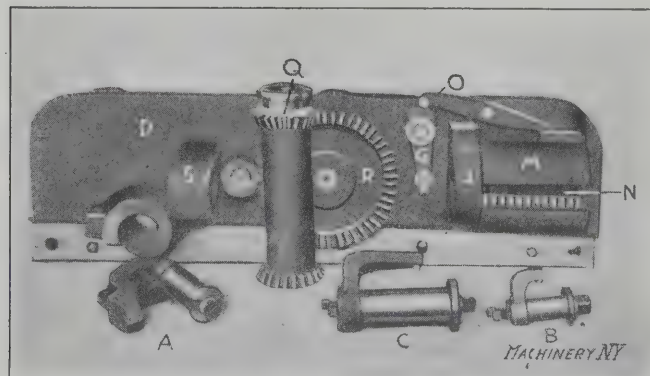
Testing Fixture for Parts of Lathe Apron .
